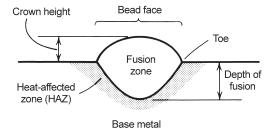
Weld bead geometry showing fusion zone, heat-affected zone, and base metal. Source: Ref 1.3
